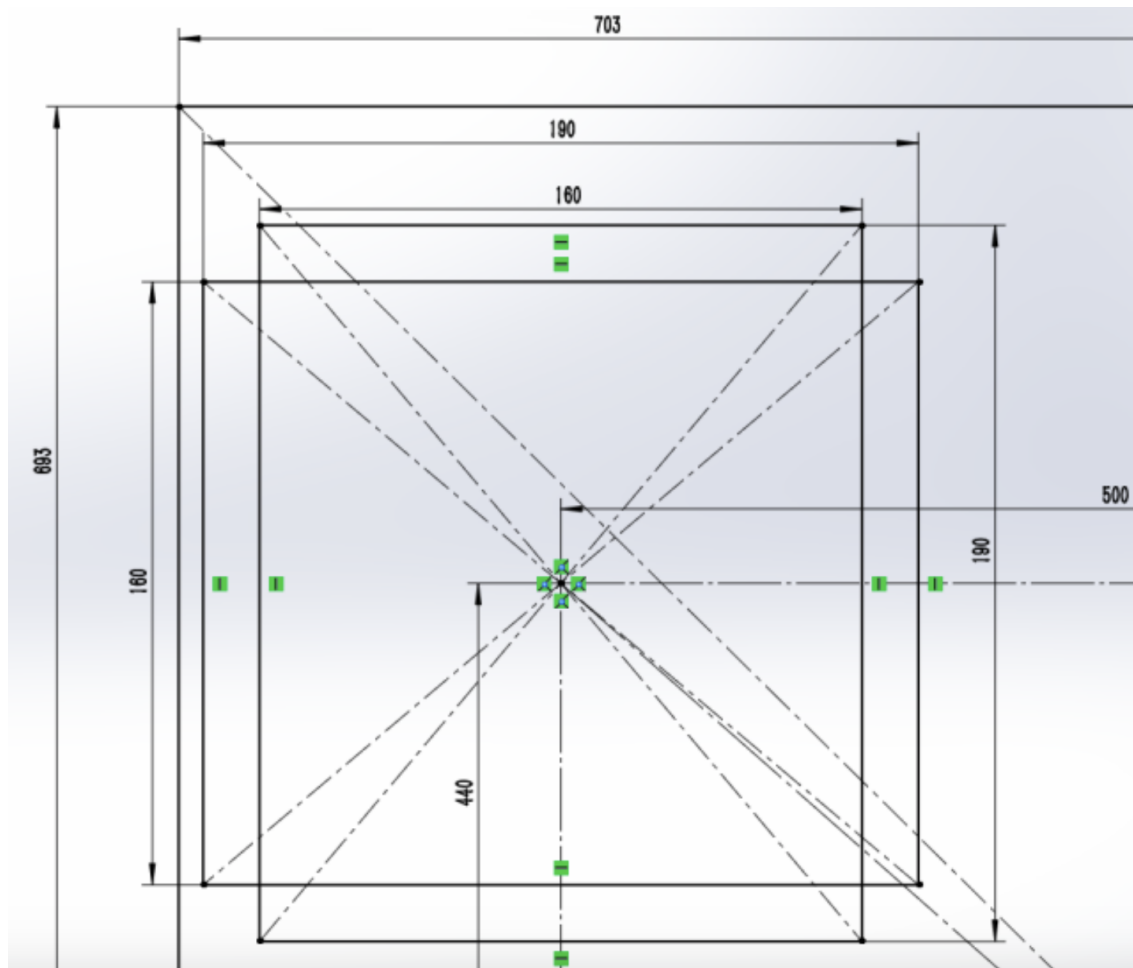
M2 Mirror Panel Dimensions (units in mm)
